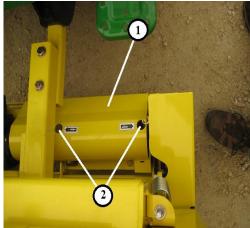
Main Drive Key 1 – Shield Key 2 – Jackshaft Bearings (2)
